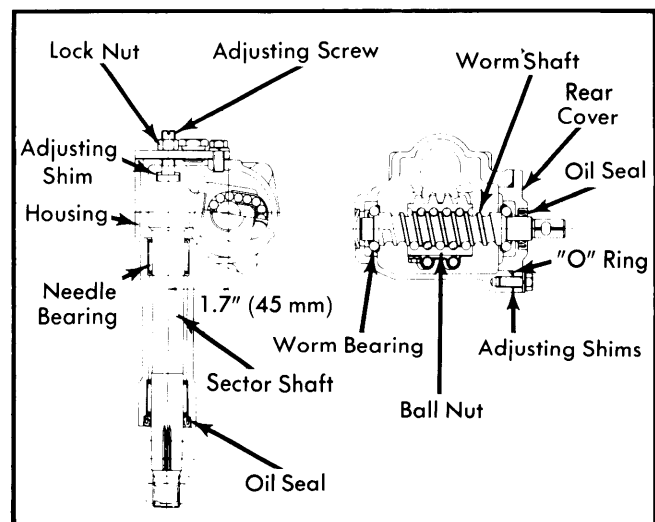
Sectional View of Datsun Recirculating Ball Steering Gear
